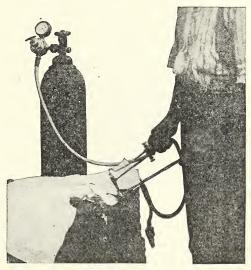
Lead burning with a gas and compressed oxygen flame. The vent plugs of the cells should be open and the top of the battery covered with a damp cloth to avoid possible explosions. The oxygen tank should be provided with a reducing valve, the pressure of the oxygen not exceeding 5 pounds
